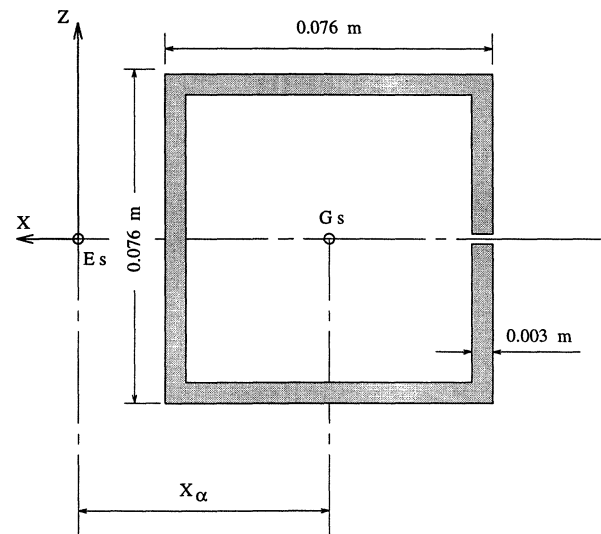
Sectional details of an open box beam: E_s shear centre; G_s mass centre.
